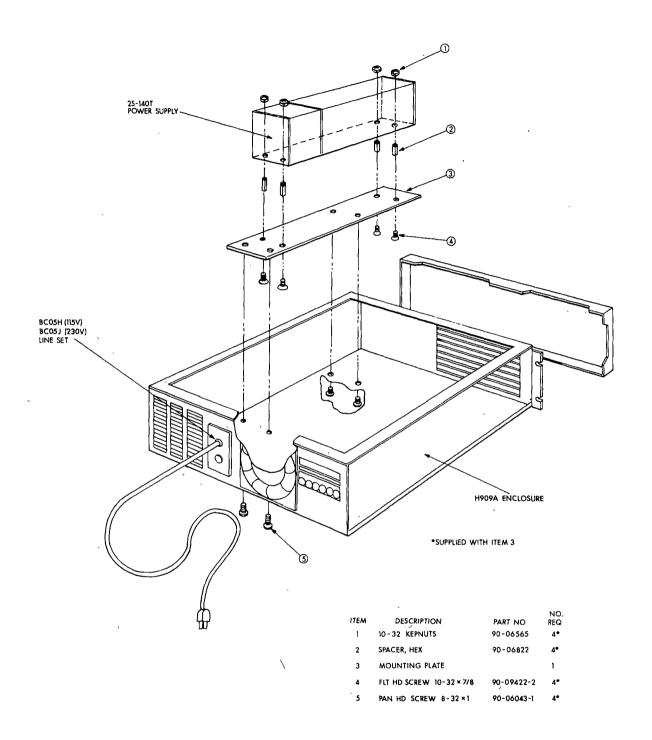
2S-140T Power Supply Mounting in H909-A Enclosure
